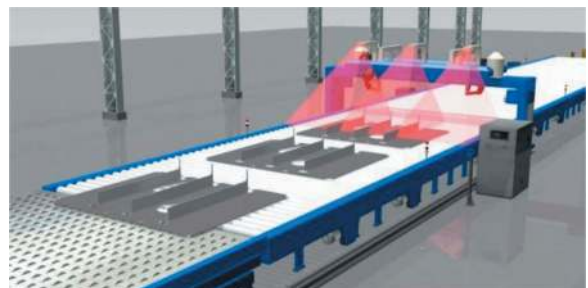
Schematic diagram of sheet body intelligent welding production line.
